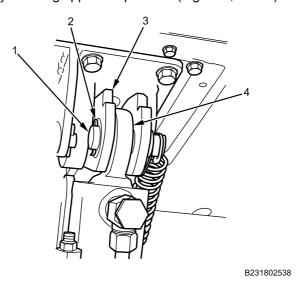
Rear Door/Ramp Hydraulic Cylinder Installed in Upper Door Lock Bracket.
